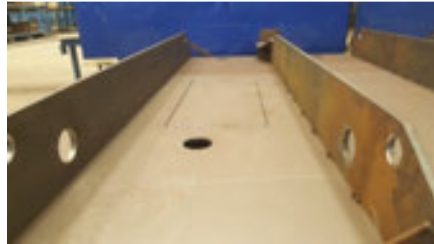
Pre-assembling of lateral walls before welding.
